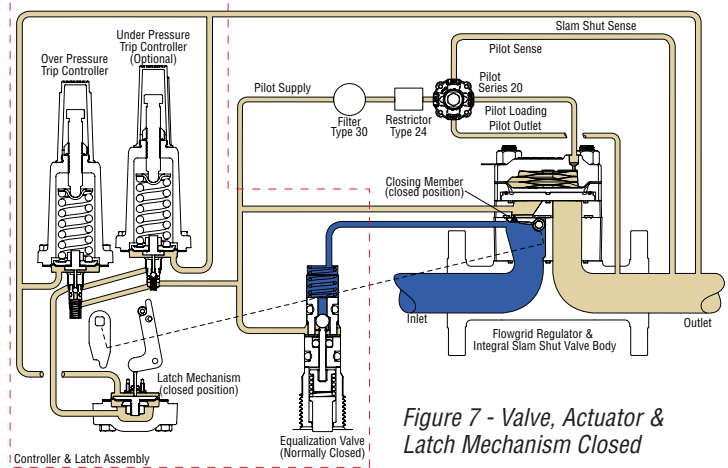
Valve, Actuator & Latch Mechanism Closed
